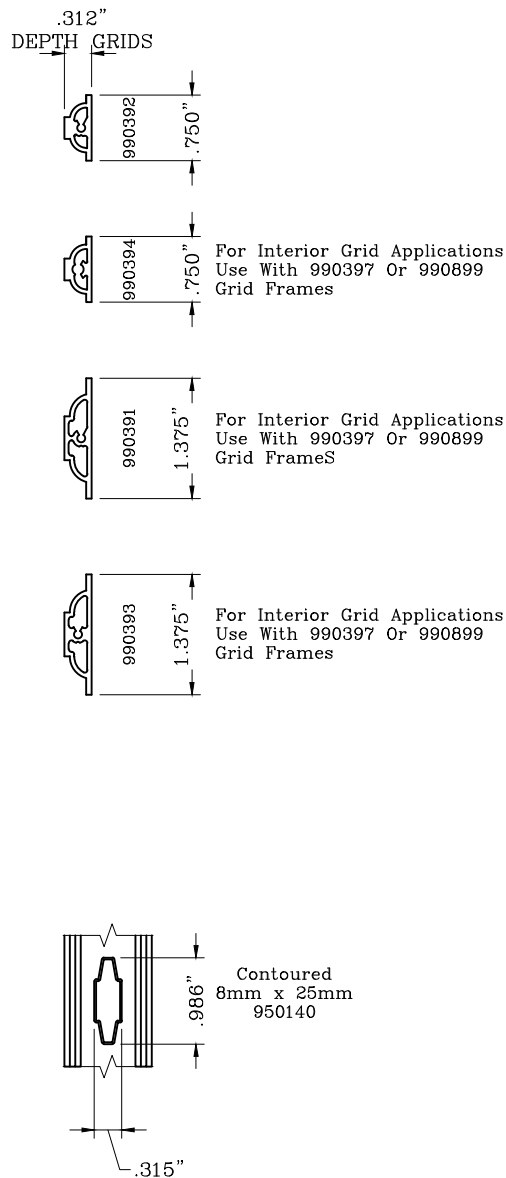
/2 Scale – For Custom Size Drawing Contact Graham
